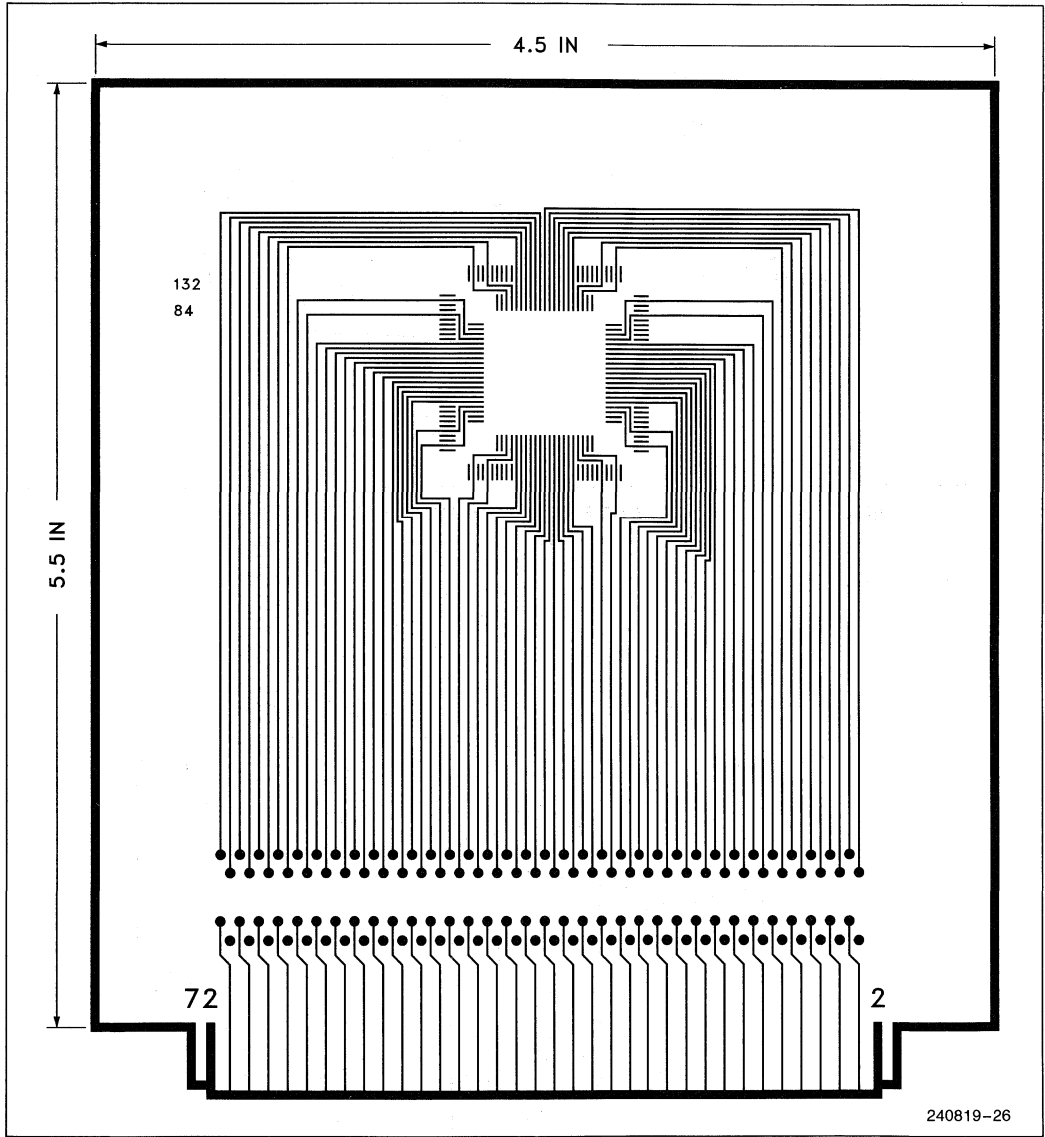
Thermal Test Board for Through Hole Mount Component
